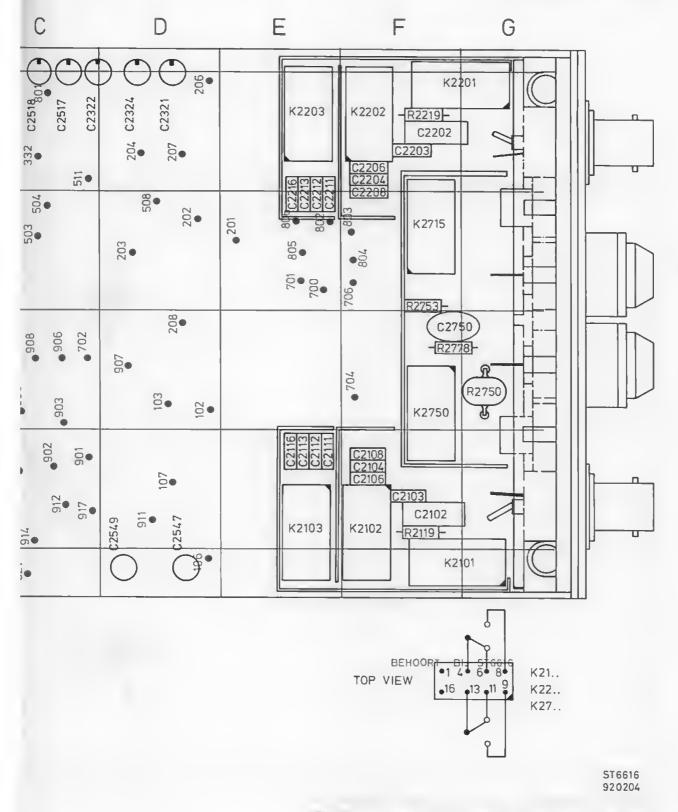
Analog A2 PCB assembly (Wired components side)
